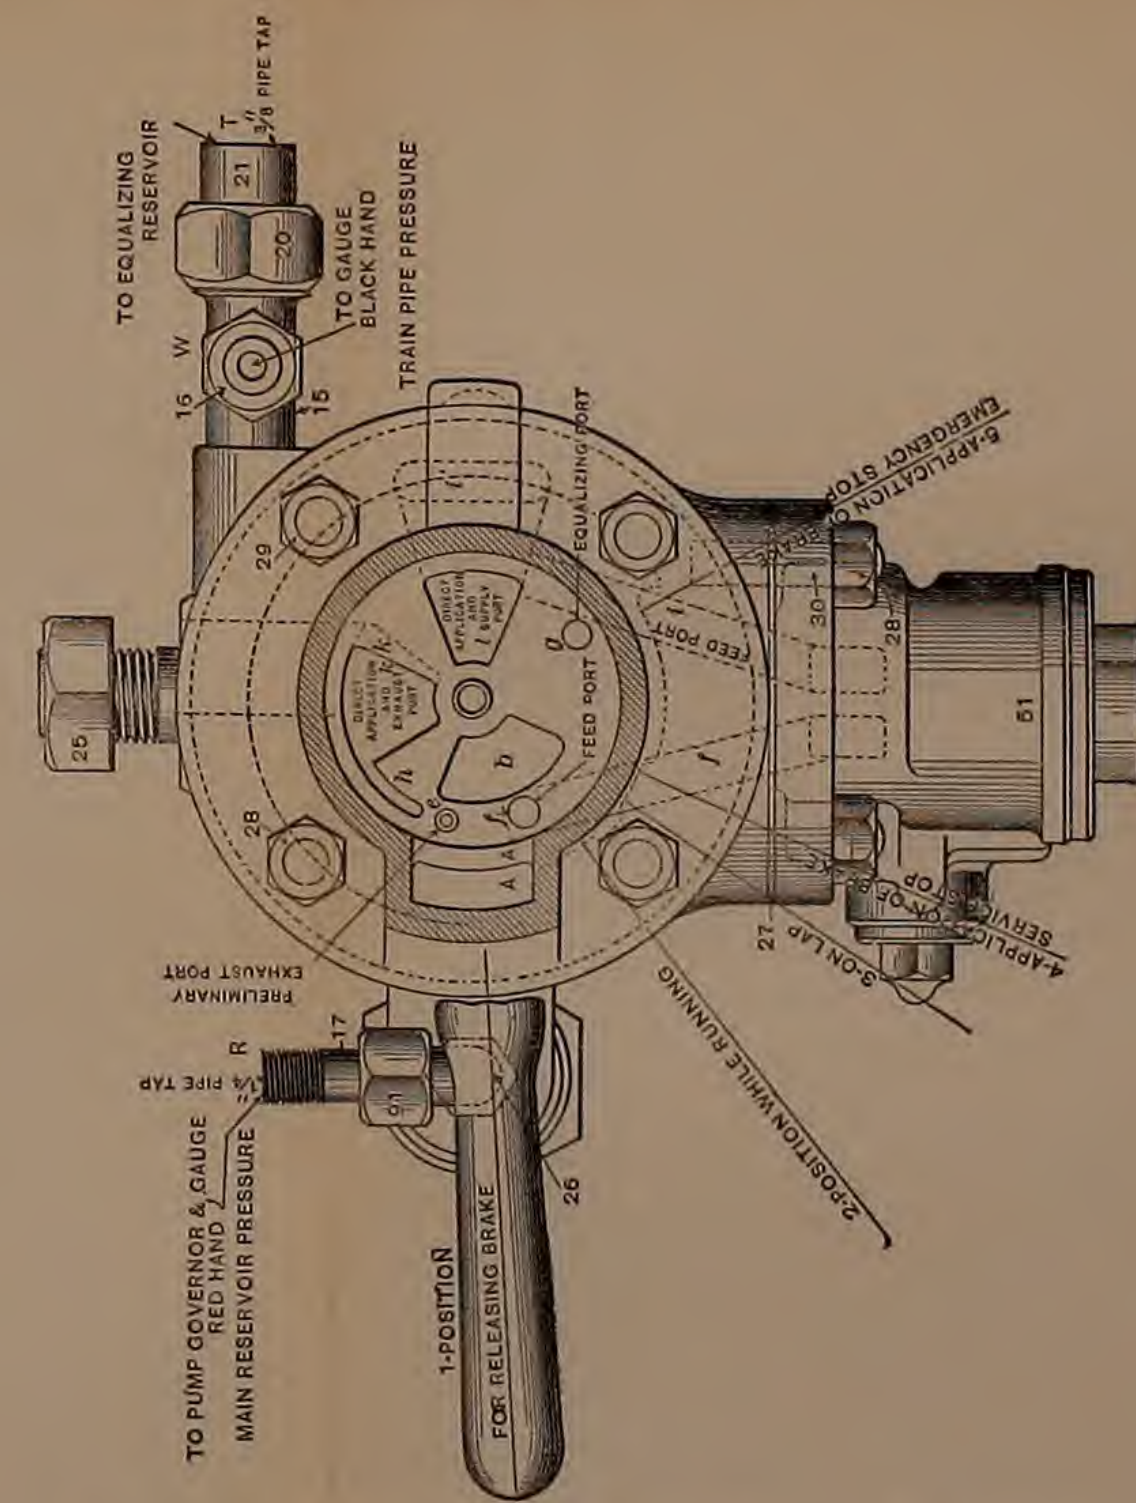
G 6 ENGINEER'S BRAKE VALVE, PLAN VIEW.
